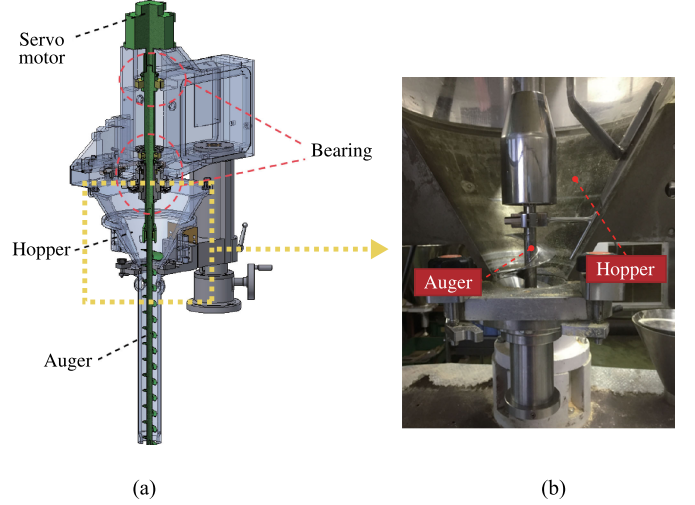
Experimental setup. (a) Structure of auger filling machine. (b) Picture of the auger part.
